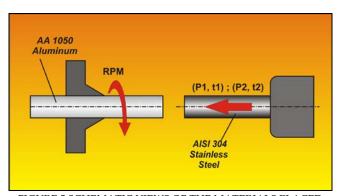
SCHEMATIC VIEWS OF THE MATERIALS PLACED BEFORE WELDING
